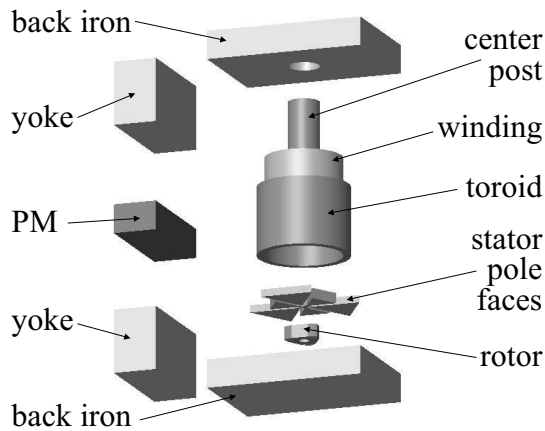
Generator assembly (engine housing suppressed for clarity).
